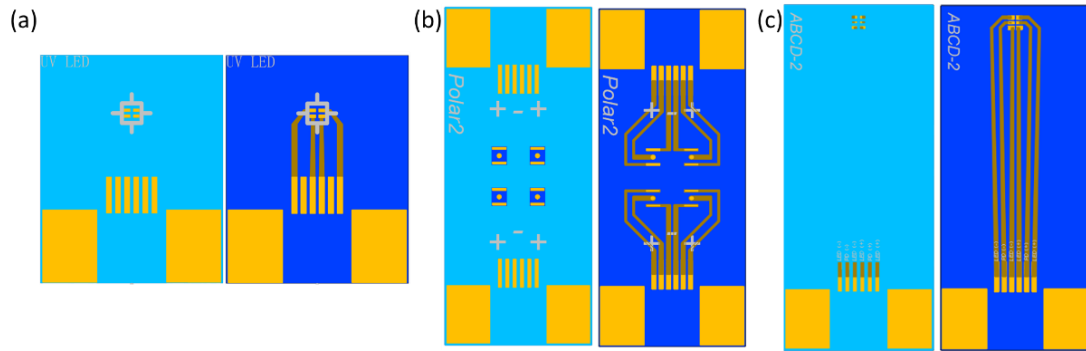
PCB design of pads and inner layer alignment for (a) droplet microsensor, (b) pH sensor, and (c) organic liquid optoelectronic nose.
